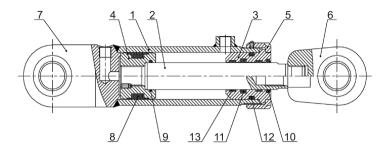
Scheme of hydraulic cylinder Rys. 1. Postać konstrukcyjna siłownika hydraulicznego
